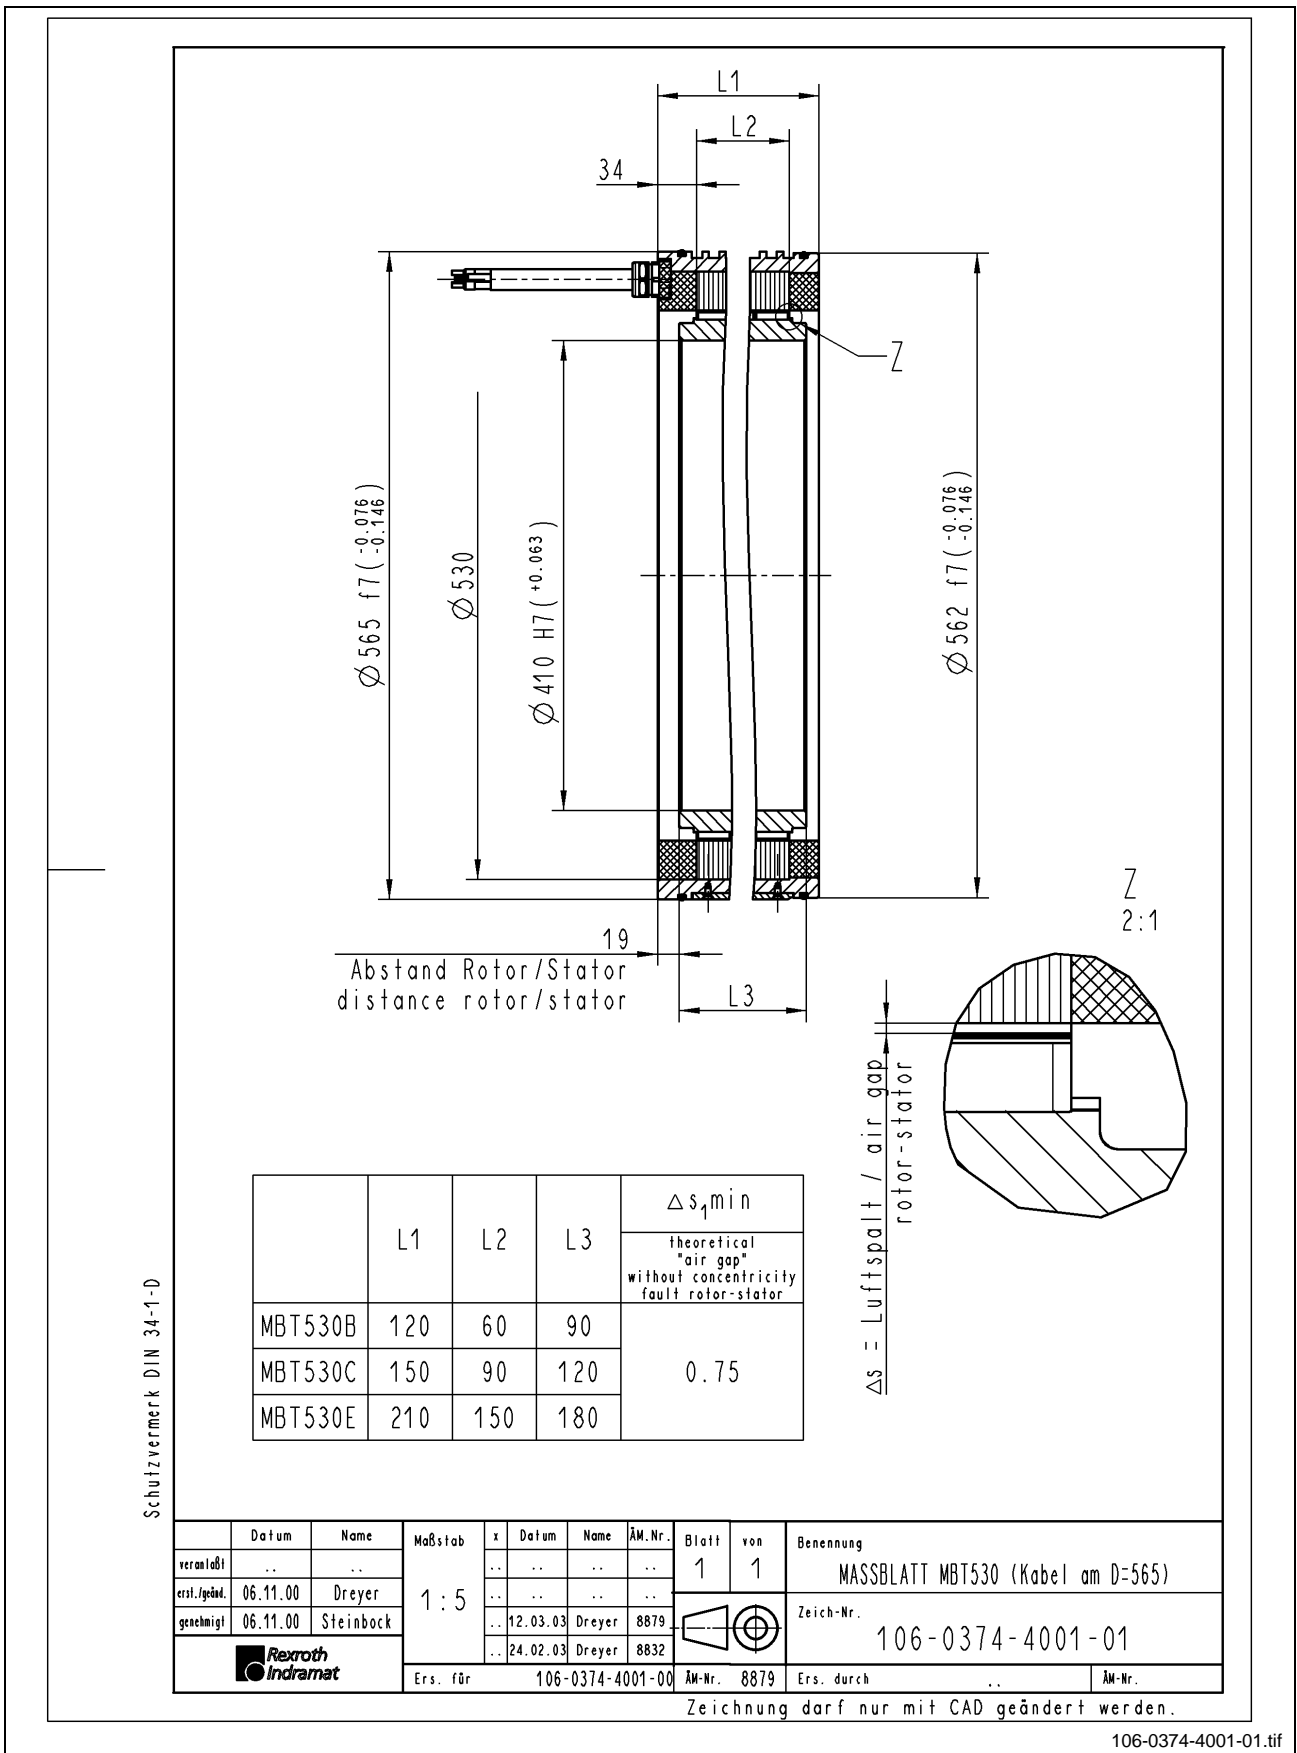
Dimension sheet size 530, electrical connection "CN"
